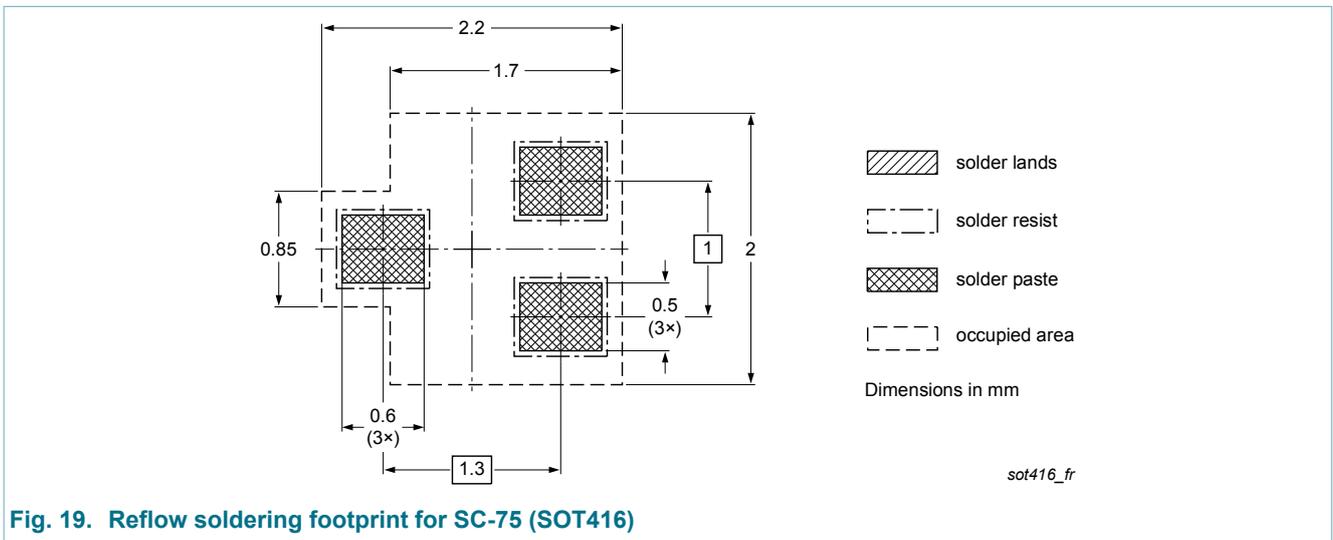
Reflow soldering footprint for SC-75 (SOT416)
